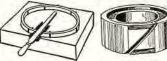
Filing a ring joint: The groove on the block is used when reducing the diameter of diagonally slotted rings.
